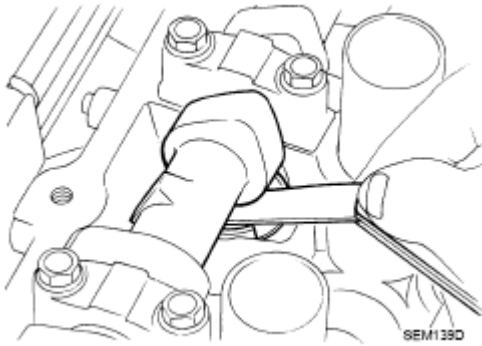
Checking Clearance Between Valve Lifter And Camshaft
